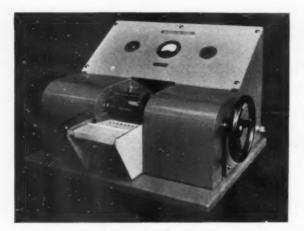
Semi-automatic magnetic crack detector testing an aero-engine gudgeon pin.
